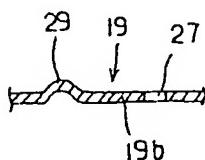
is an exploded perspective view of a upper gusset according to an embodiment of the present invention; FIG. 2 is a cross-sectional view taken along the line II-II in FIG. 1; FIG. 3 is a perspective view of a coupling structure cross member and side rail by use of conventional upper gusset and lower gusset; and FIG. 4 is a perspective view of conventional upper gusset and lower gusset.
